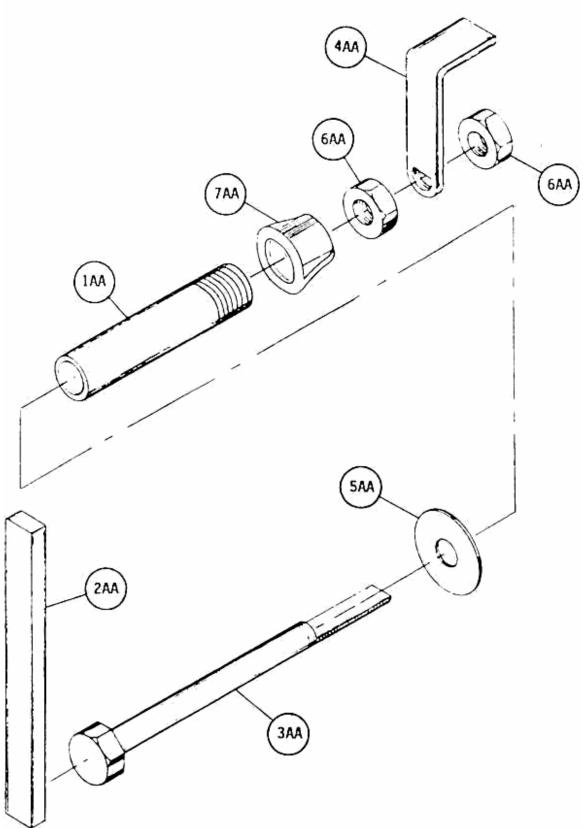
Exploded, schematic diagram of the grate shaking mechanism.
